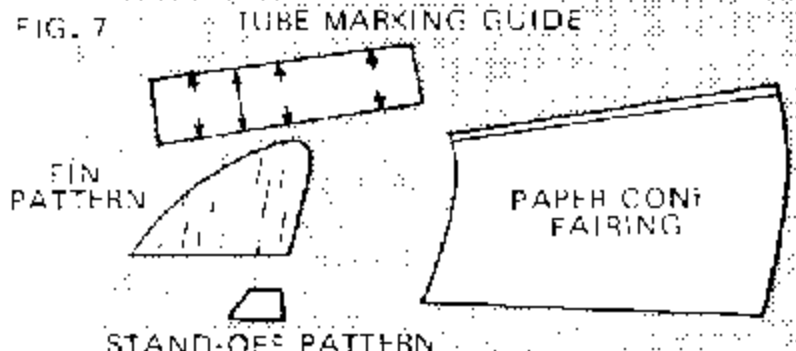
Carefully trace the fin pattern, stand-off pattern and tube marking guide onto a separate piece of paper (typing paper will do). Cut out the copies you have made.
